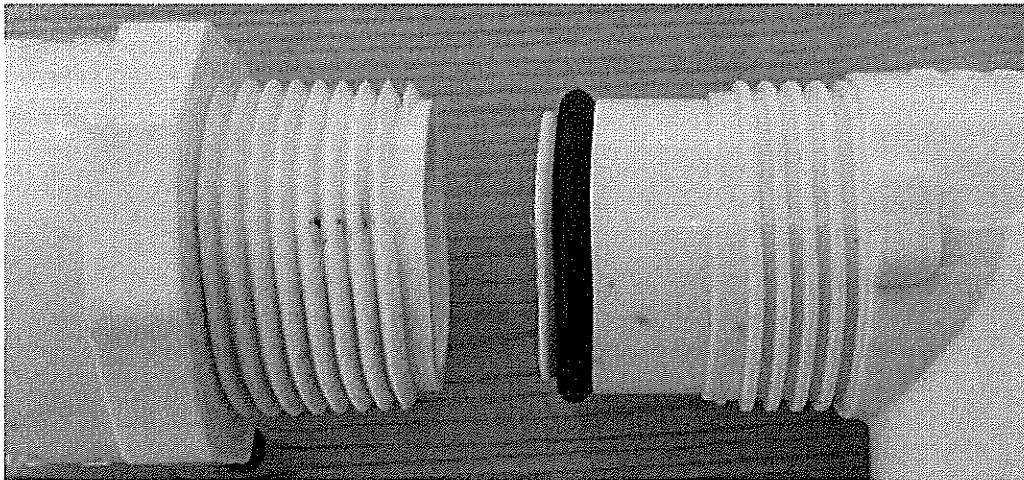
(left) IPT/NPT fitting - pointed apex and valley thread. (right) ACME fitting — flat apex and valley thread configuration with O-ring.
